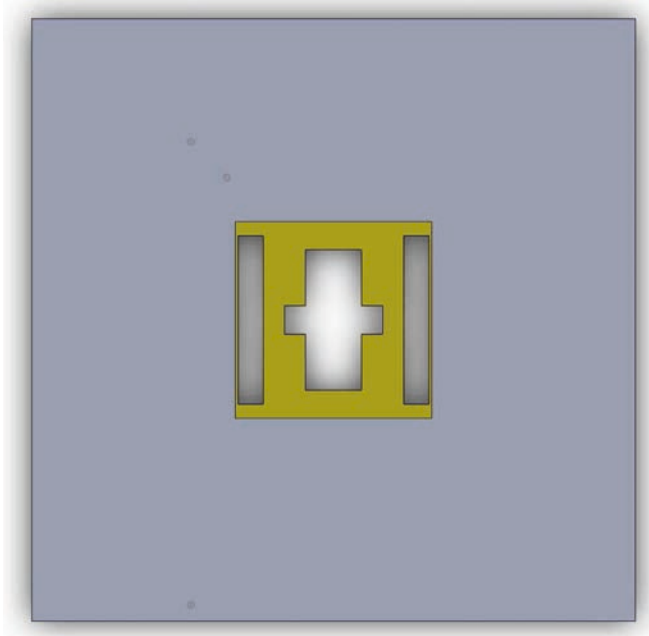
Picture showing the modified chip carrier, slots are laser cut into the central cavity plate.
